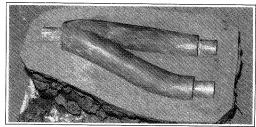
Preparing the core pattern to make a Fig. 7. The manifold as cast showing square
